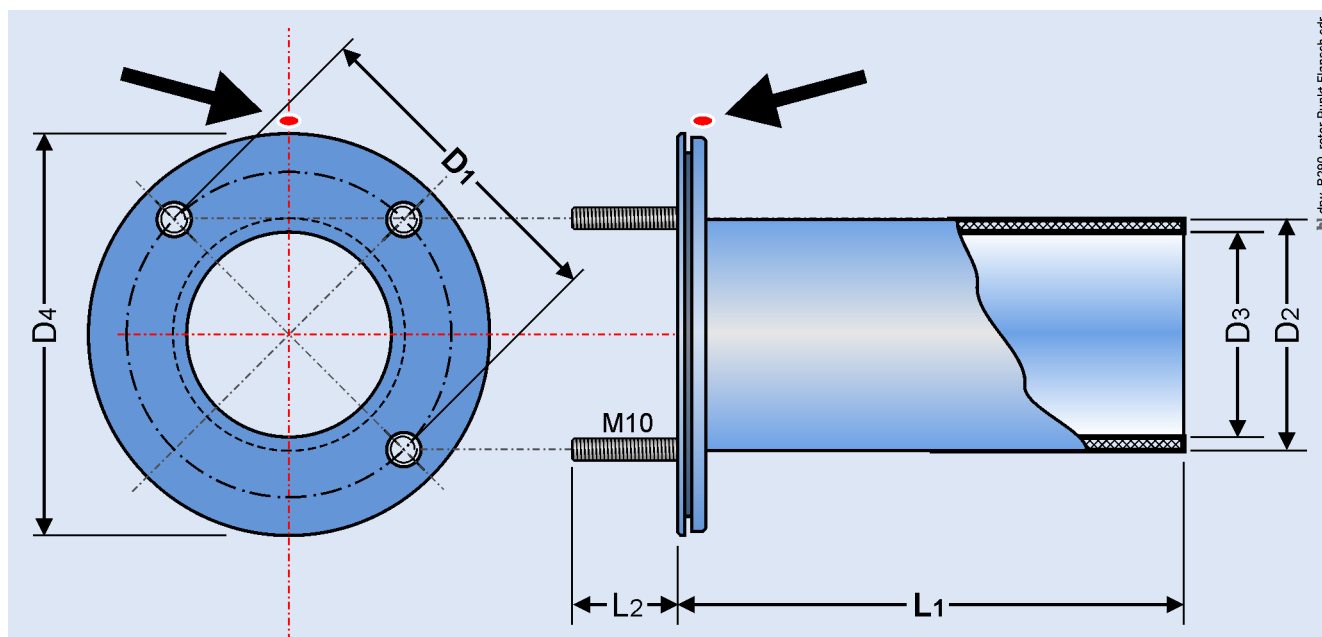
Dimensional diagram D-R 290 standard welded-in pipe with adjustment flange (↘ = red dot)
